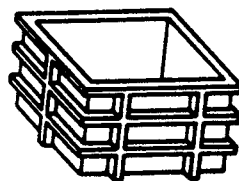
Tank with cross-ribbed horizontal and vertical stiffeners
